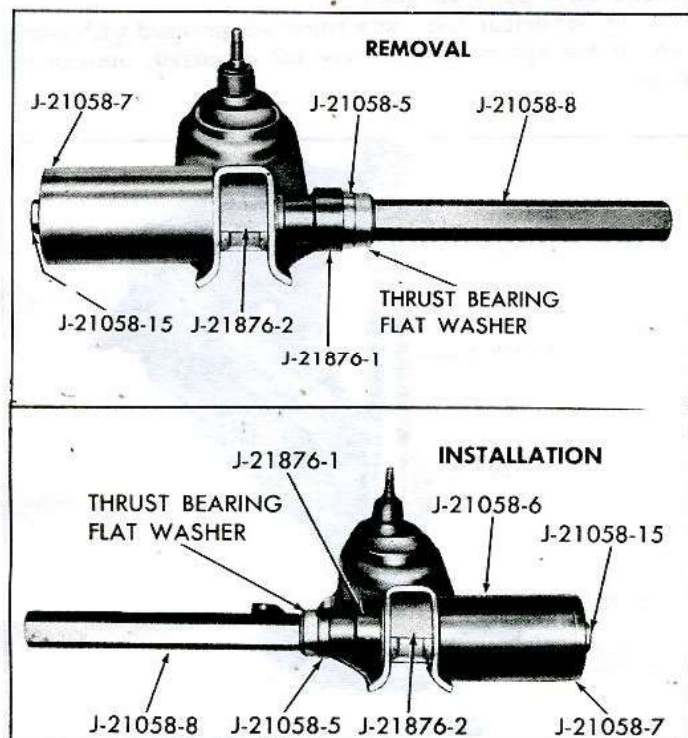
Removing and Installing Lower Control Arm Bushings
